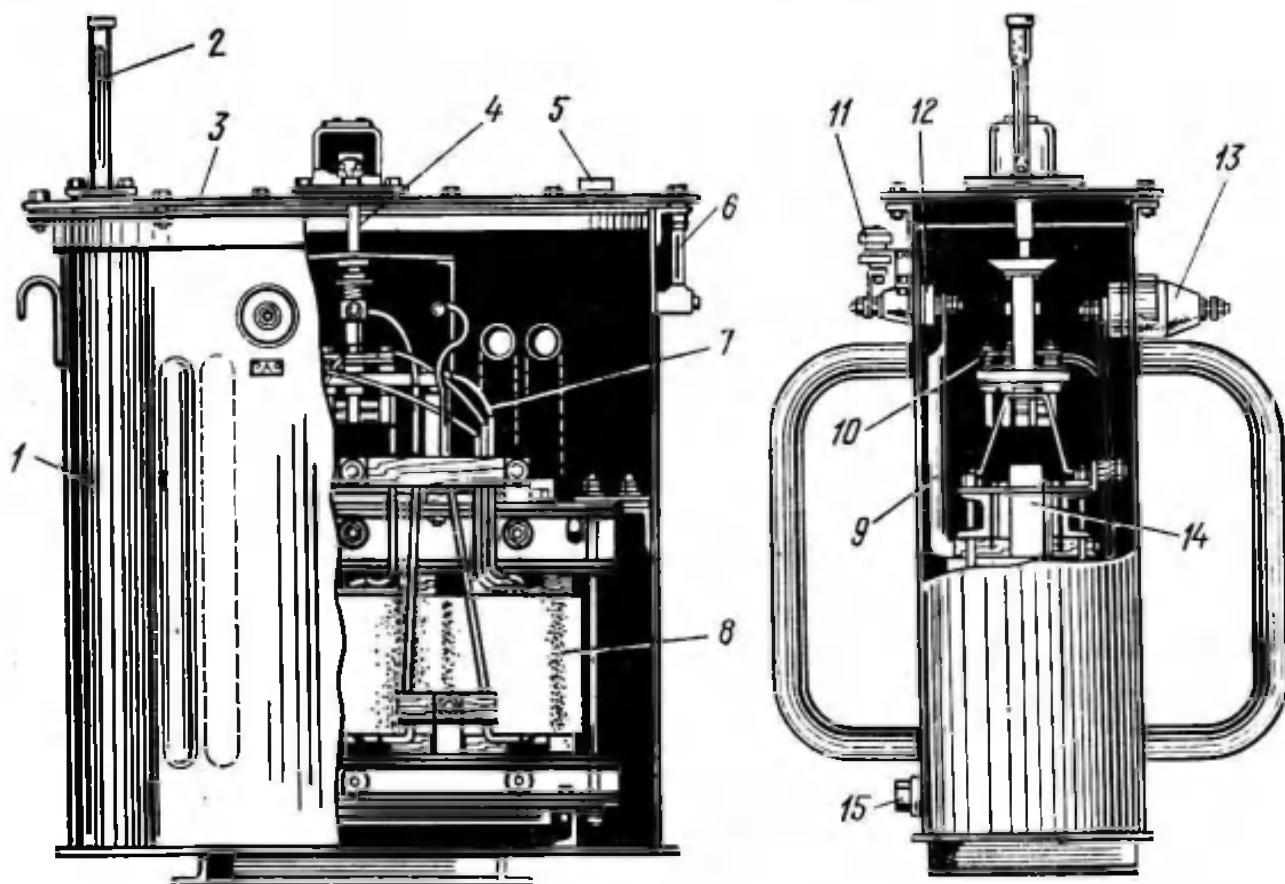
Type TM-50/6 three-phase transformer for $6\ 000 \pm 5\% / 400\ V$
